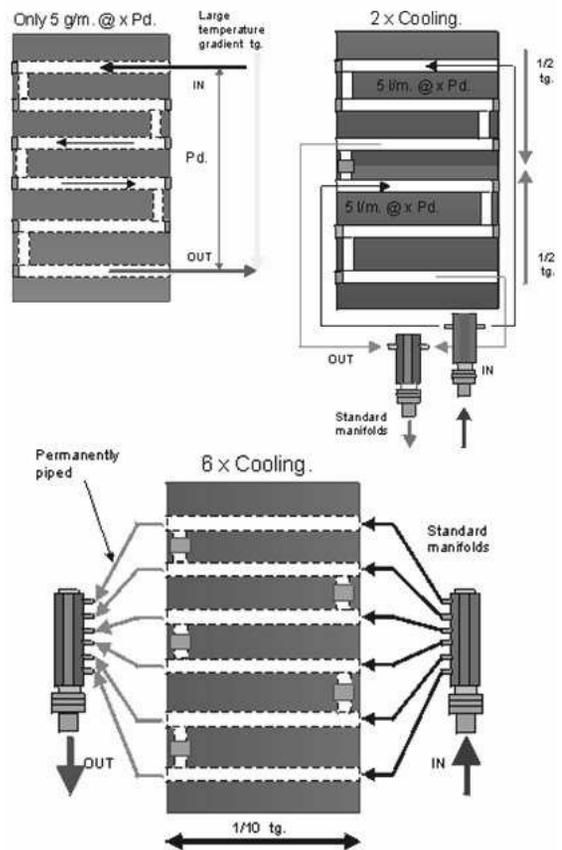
Three different approaches to cooling channels in the same mould: a) typical joining of cooling channels, b) two-way manifolds, c) two mould mounted manifolds [6]
